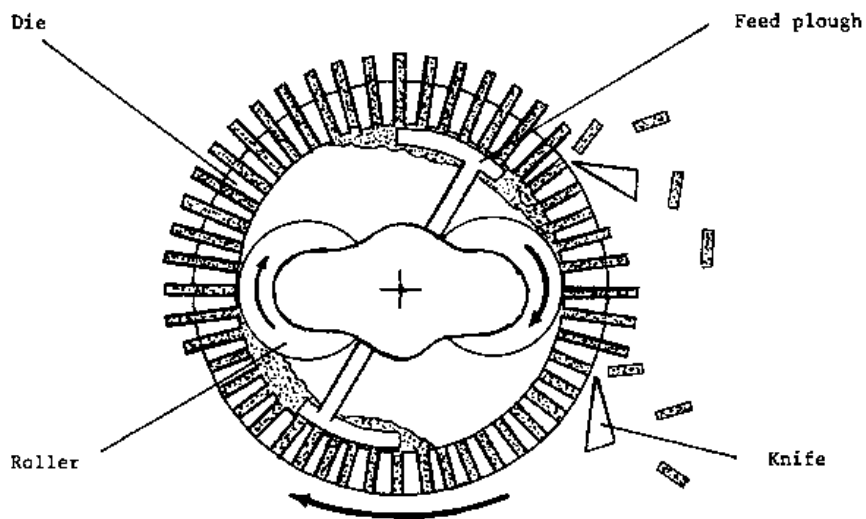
Cut away diagram of a pellet mill extrusion die assembly.
